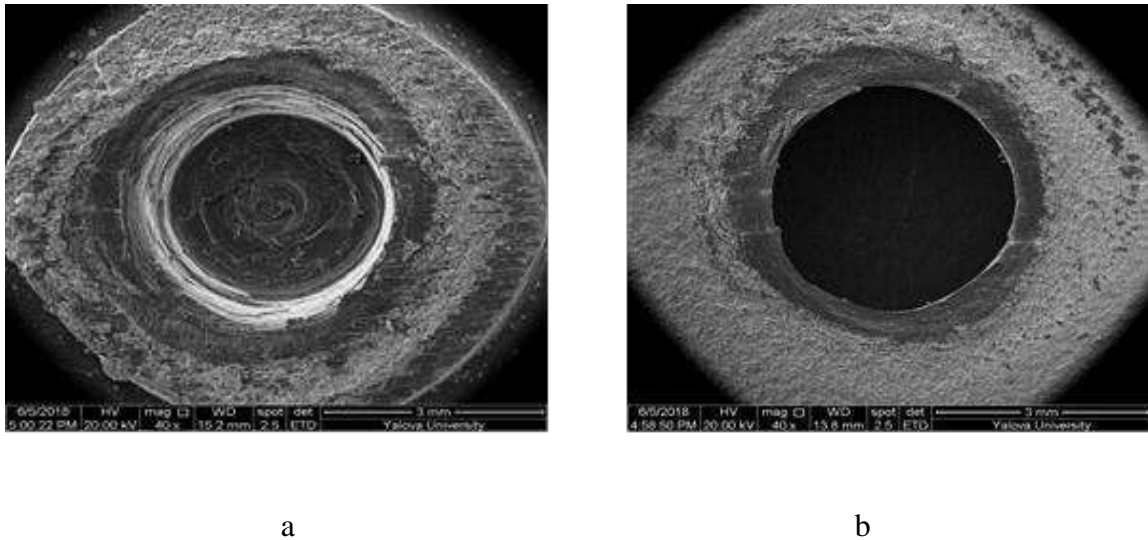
SEM fractograph macrographs of the a-lower surface specimen AA1050 aluminum alloy b- Nickel coated upper surface AA5754 aluminum alloy fractured after shear tensile test with Interfacial mode
